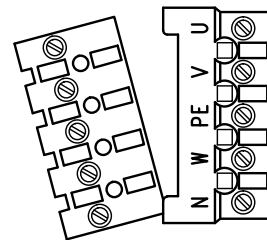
Motor Terminal Rail for single-phase motor asymmetric winding
